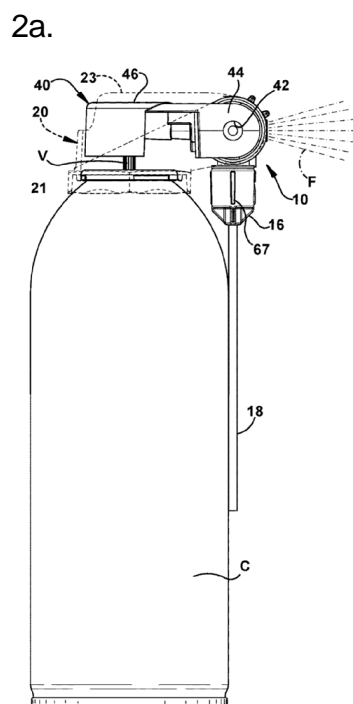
illustrates a downward position of an outlet tube (18) supplied by a rotatable valve assembly.
